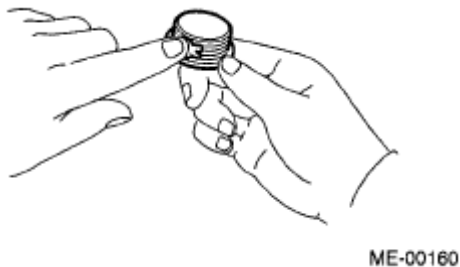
Applying Liquid Gasket To Threaded Portion Of Service Hole Plug
